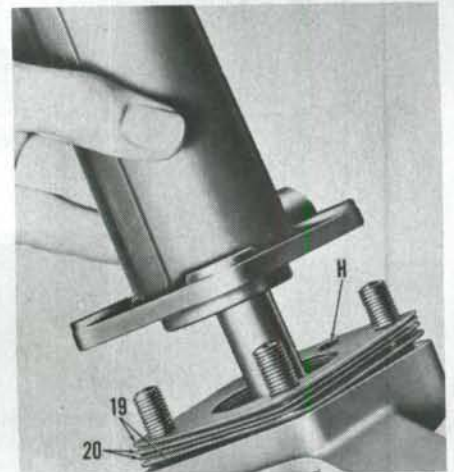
Shims are used between steering column and gear housing to adjust worm-shaft bearings. A gasket (19) should be placed each side of shim stack (20). Be sure oil holes (H) in shims and gaskets are aligned with oil holes in housings.
